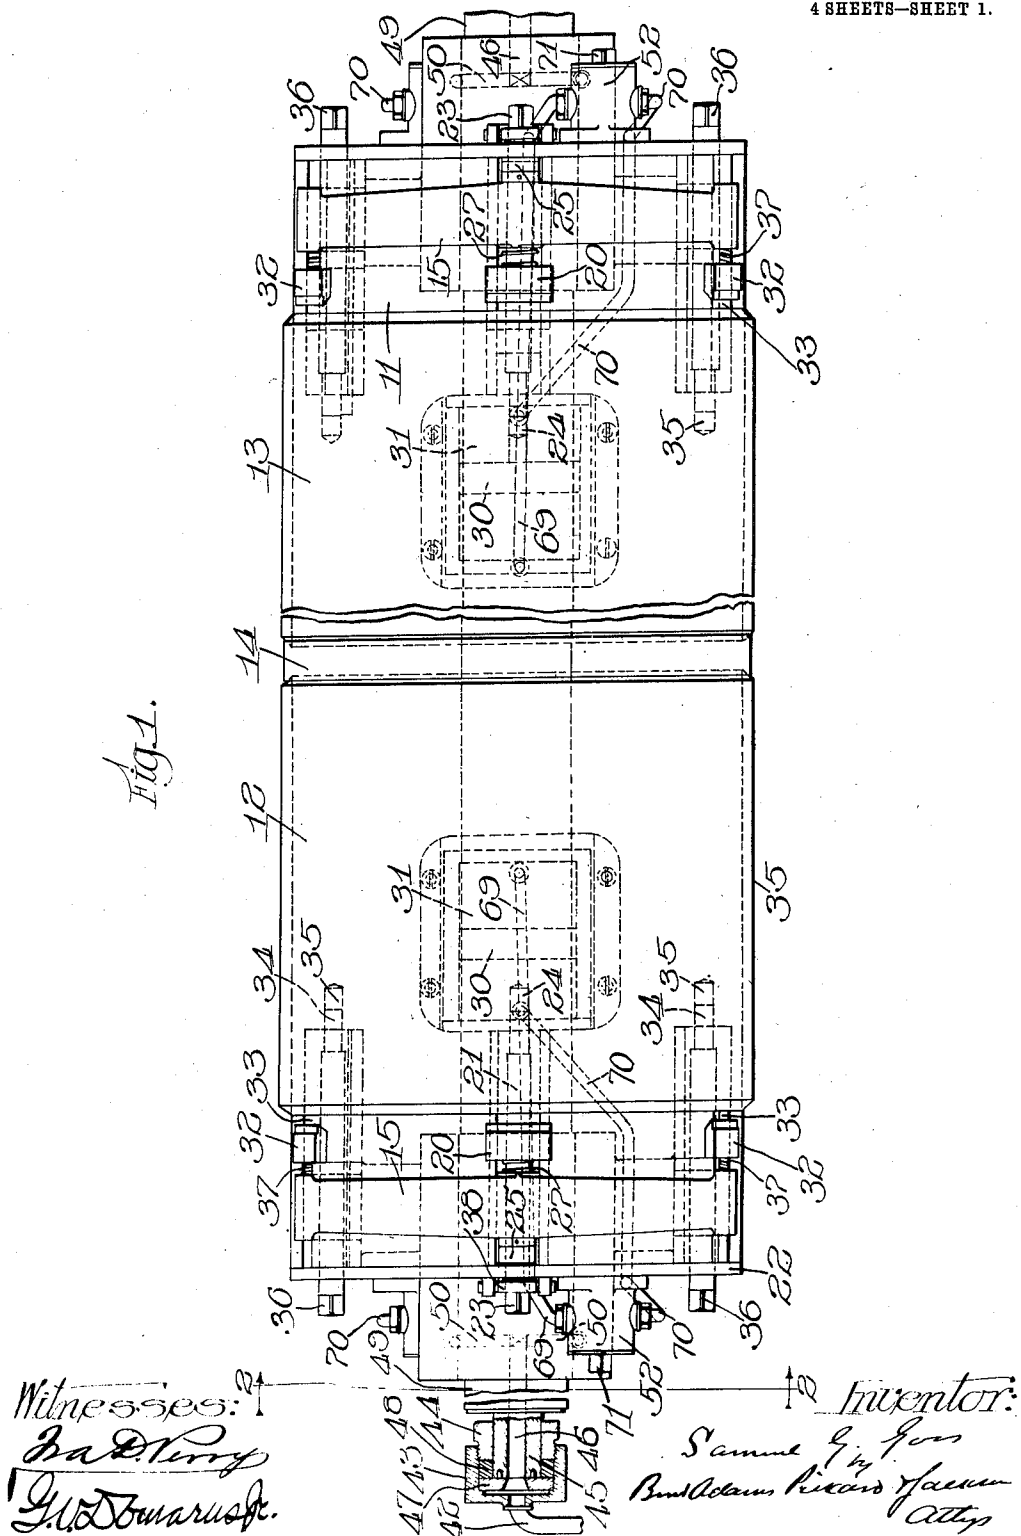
PLATE CLAMPING MECHANISM FOR PRINTING PRESSES.
